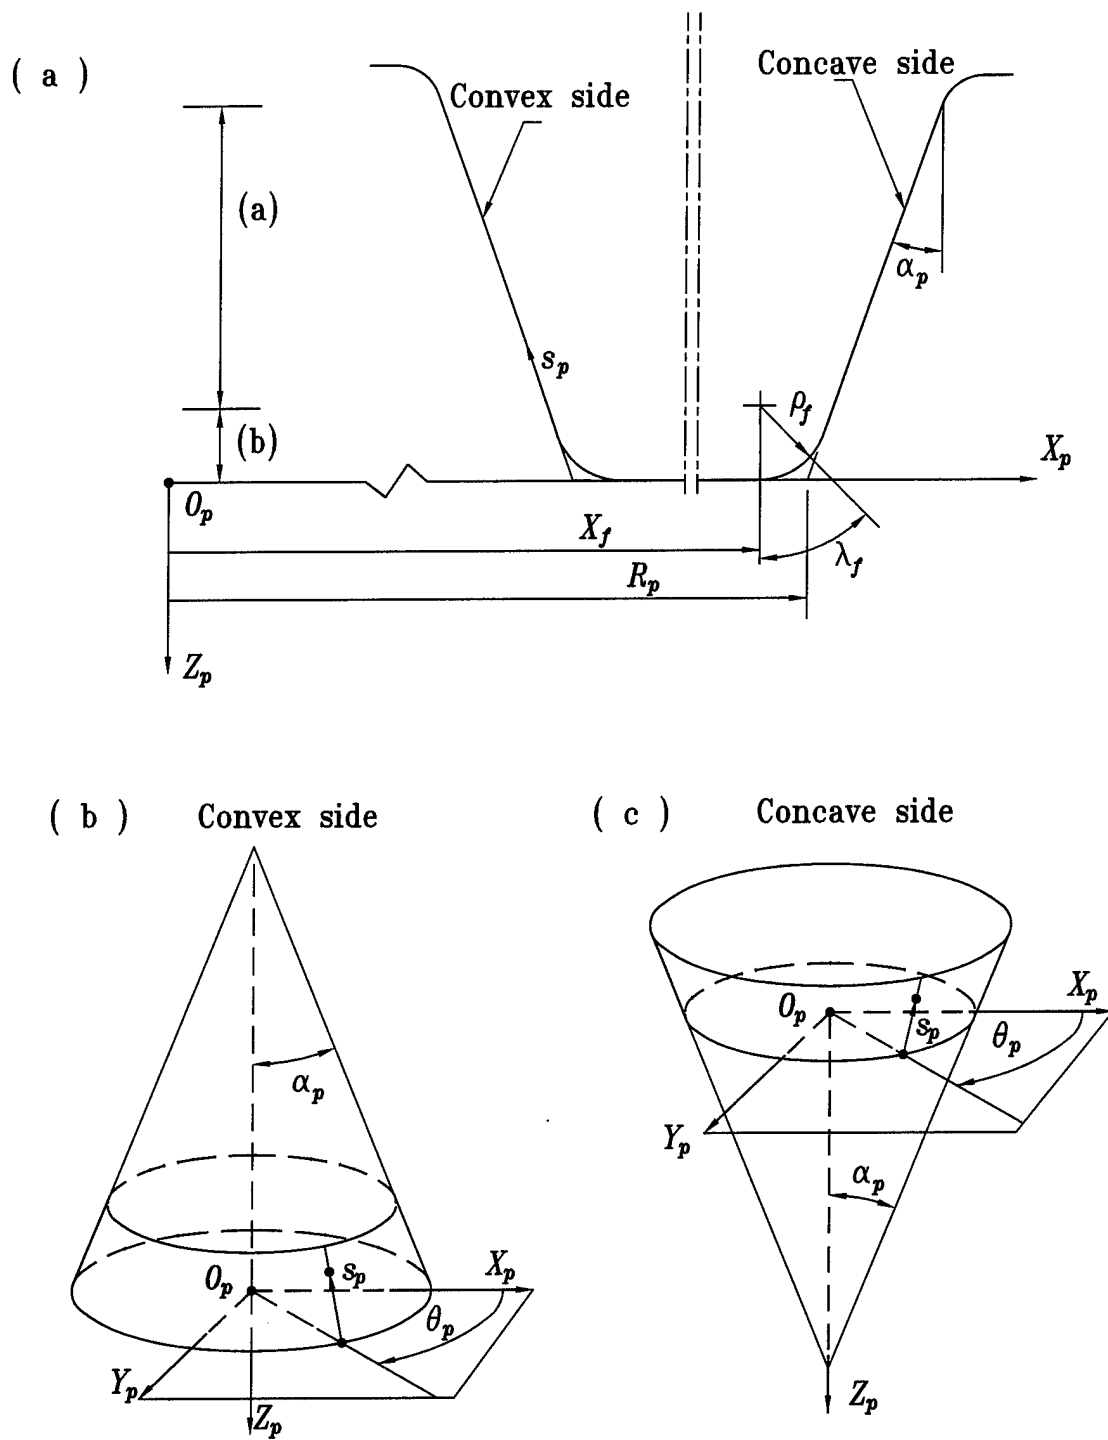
Illustration of pinion cutter blades and generating surfaces.
